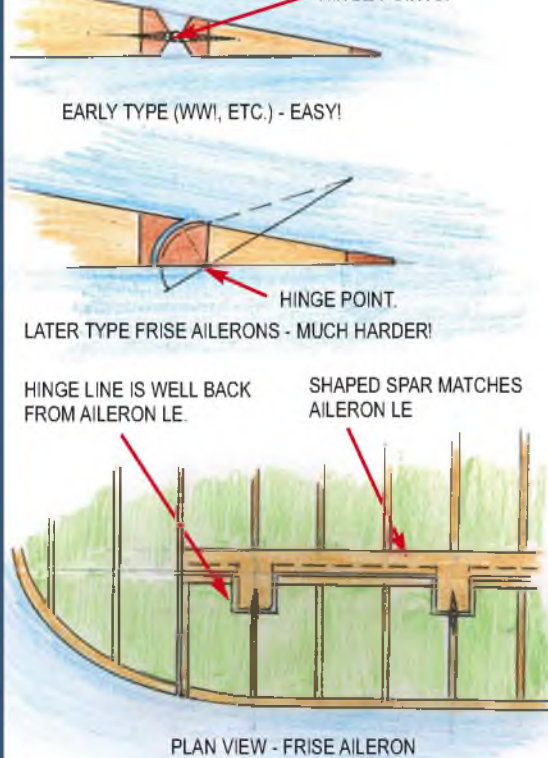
AILERON HINGING - EARLY AND LATE PERIODS.
